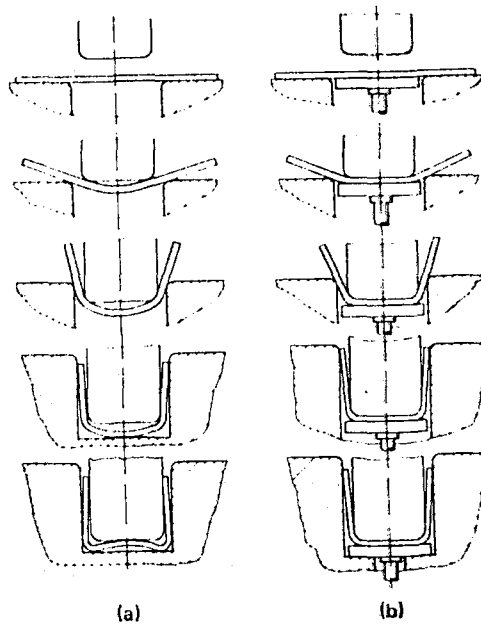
U - die bending (a) without pressure pad. (b) with pressure pad
